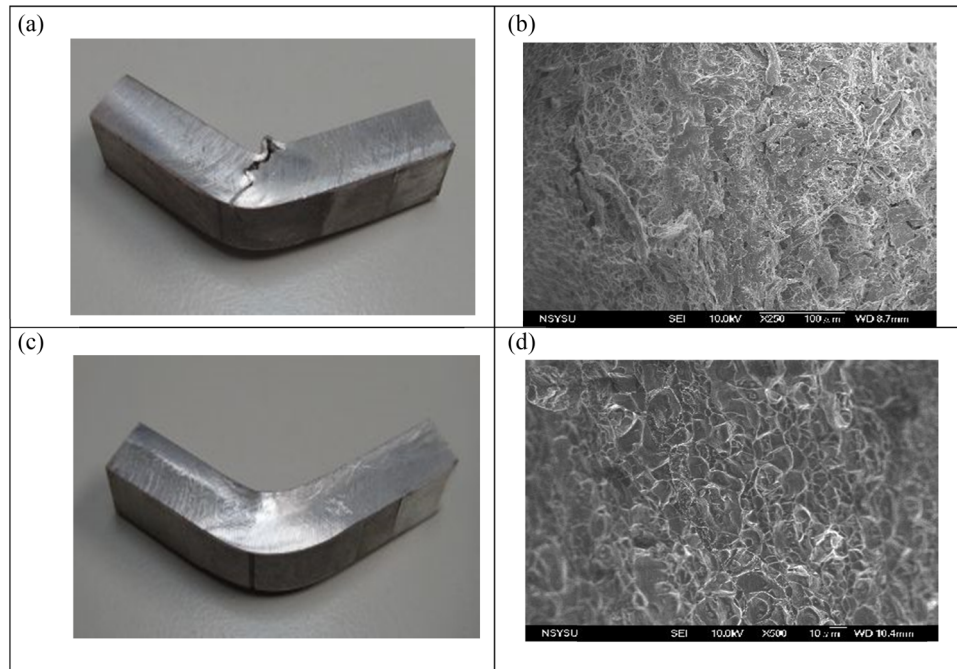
Macroscopic and microscopic structures with (a and b) test 13 and (c and d) test 6 of the welded specimens in the impact test.
